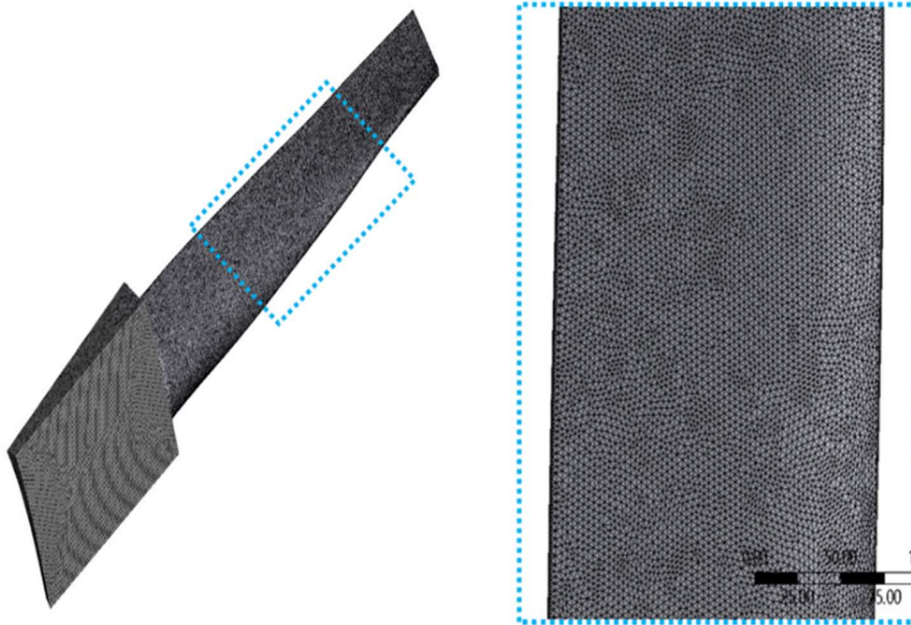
Mesh Model of turbine blade-rotor with magnified view of section of blade assembly
